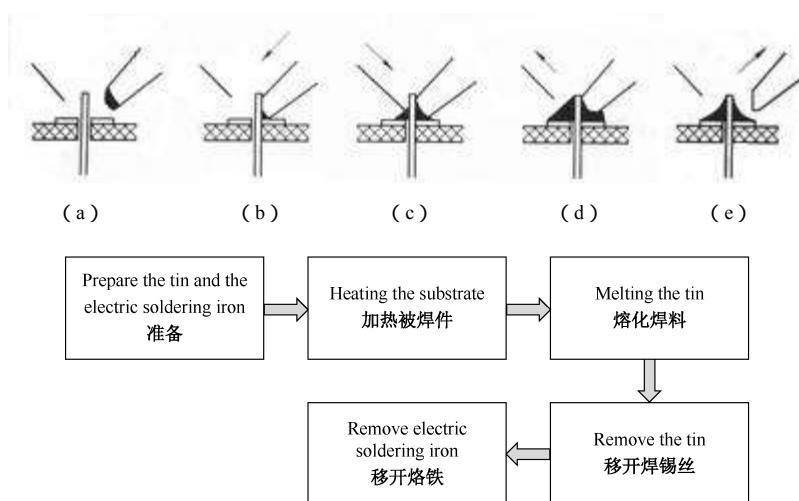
5 Steps of Welding Process 五步焊接工艺
